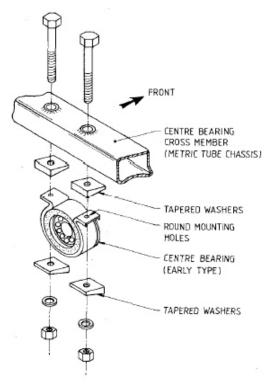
Metric Tube Chassis Centre Bearing Assembly and Tapered Washers
